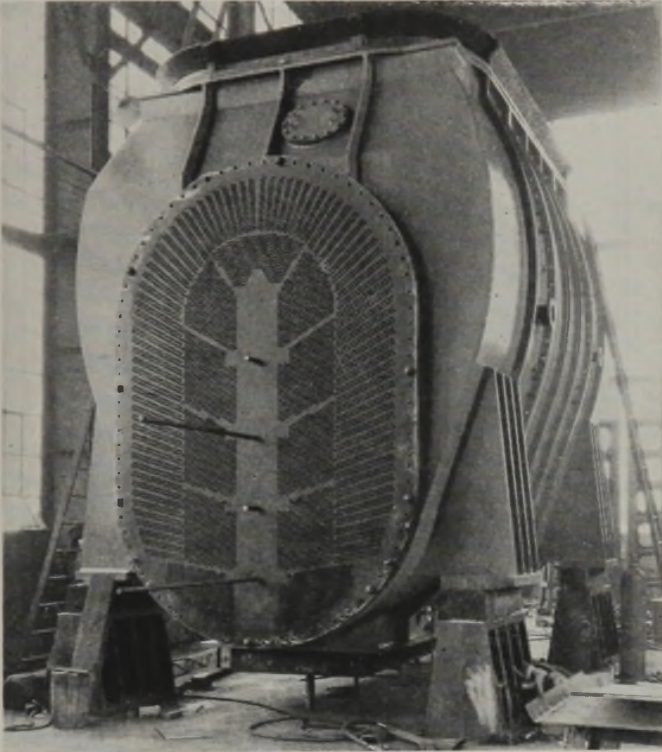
Foster-Wheeler 32,500-sq-ft surface condenser.
